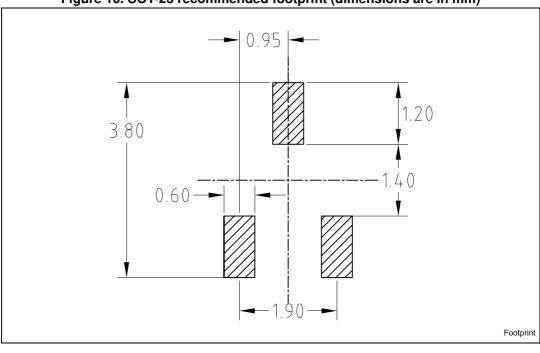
SOT-23 recommended footprint (dimensions are in mm)
